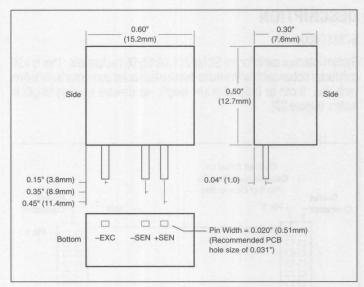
SCMXCJC Physical Dimensions And Pin Layout.
